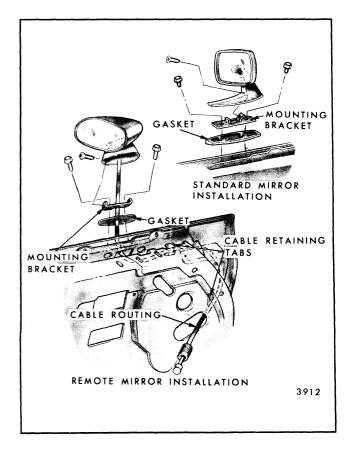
Door Outside Remote Mirror Removal - "F and X" Styles
